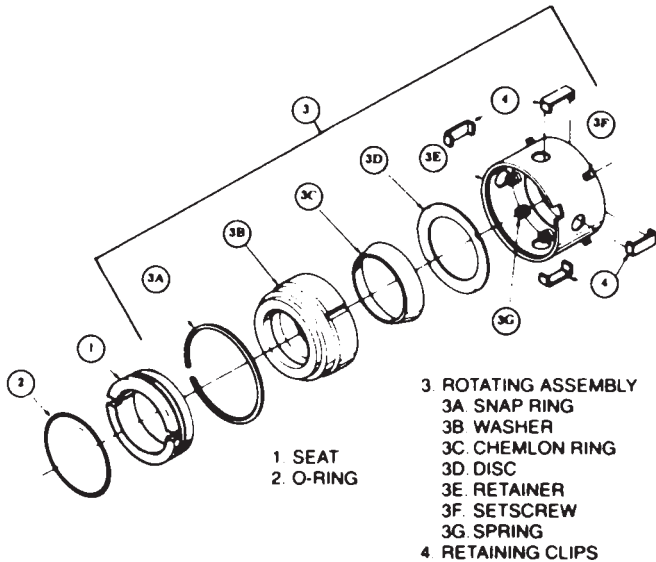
and 3) Slide stationary assembly, seat (1) and gasket (2) off power rotor shaft.
